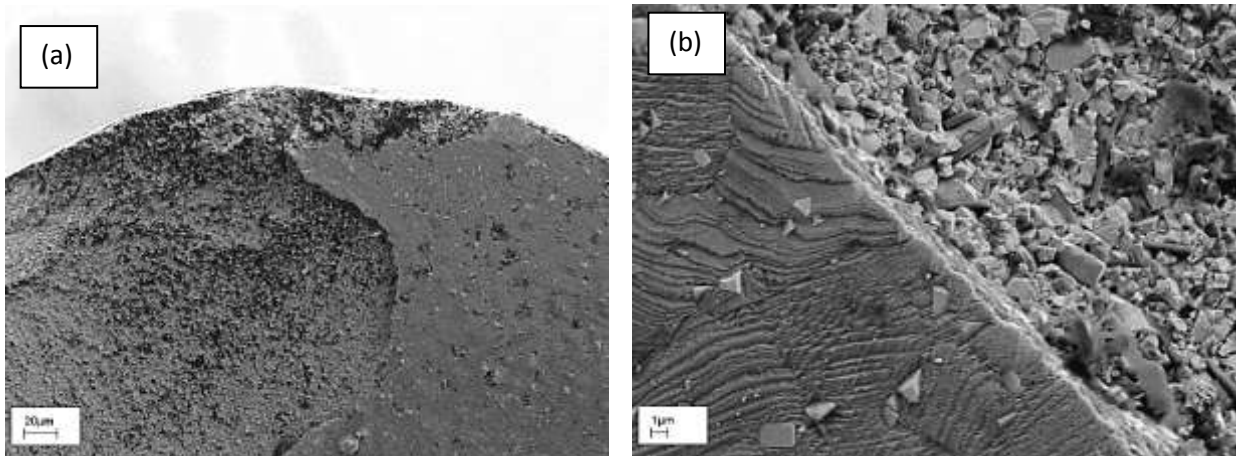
Uncoated WC-Co insert (a) cutting tip, (b) surface cobalt fracture edge
